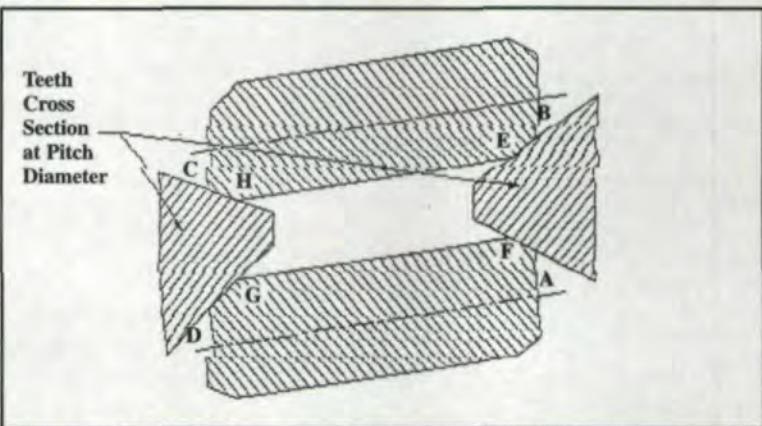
A cross section of gear and chamfering tool teeth in a rolling operation.
